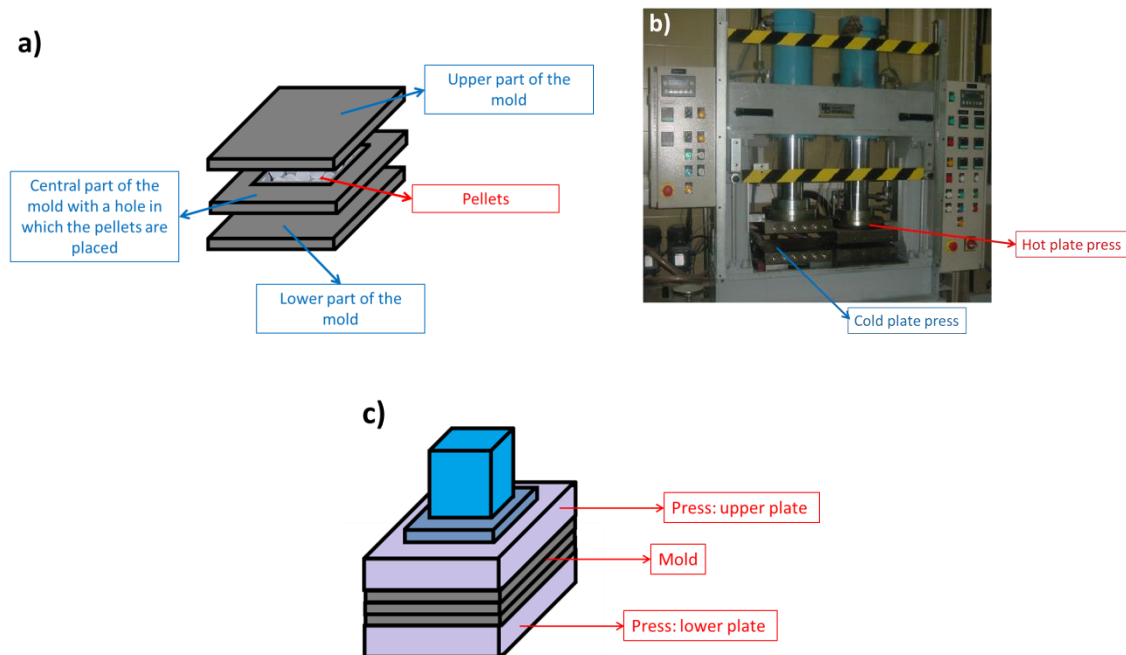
Scheme of the elements employed in the compression molding process to produce solid materials. a) Scheme of the mold. b) Image of the hydraulic hot/cold plate press used in this thesis. c) Scheme of the mold located in hot/cold plates.
